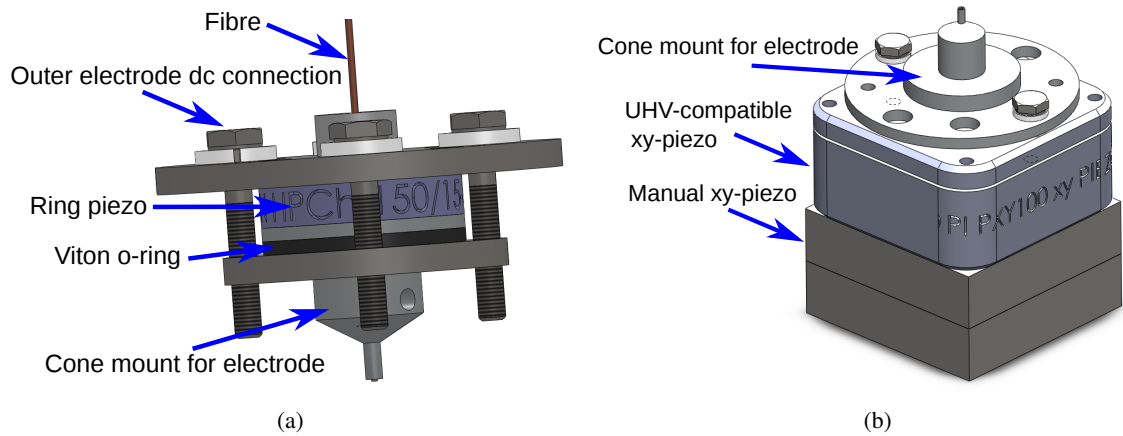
(a) The top and (b) bottom electrode assemblies.
